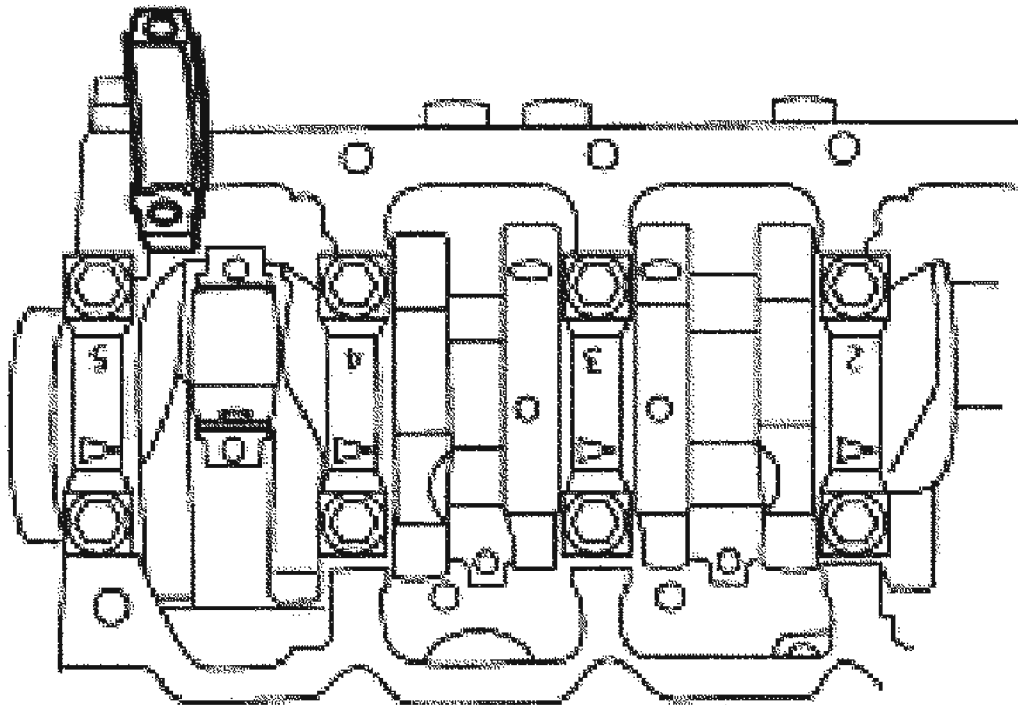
Installing Piston And Connecting Rod Assemblies
